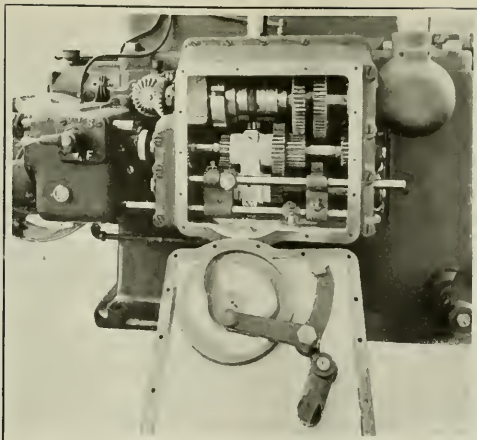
Feed-multiplying Gear-box on Left-hand Side of Machine
